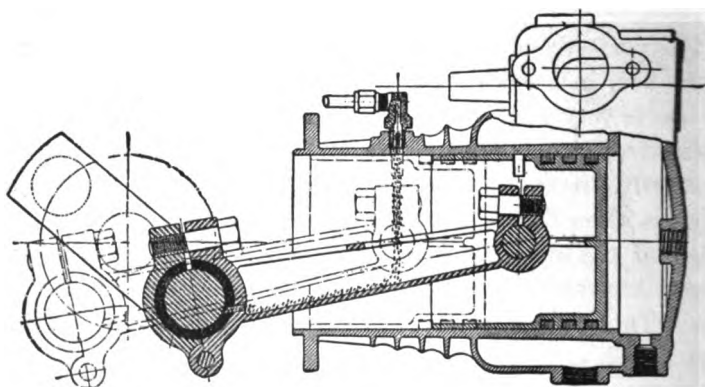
HORIZONTAL CYLINDER OILED BY FORCE-FEED OIL DISTRIBUTER. The piston is oiled when passing under oil port, as shown by the dotted outline. The connecting rod is longitudinally grooved on the upper surface, so as to carry oil to the bearings.
